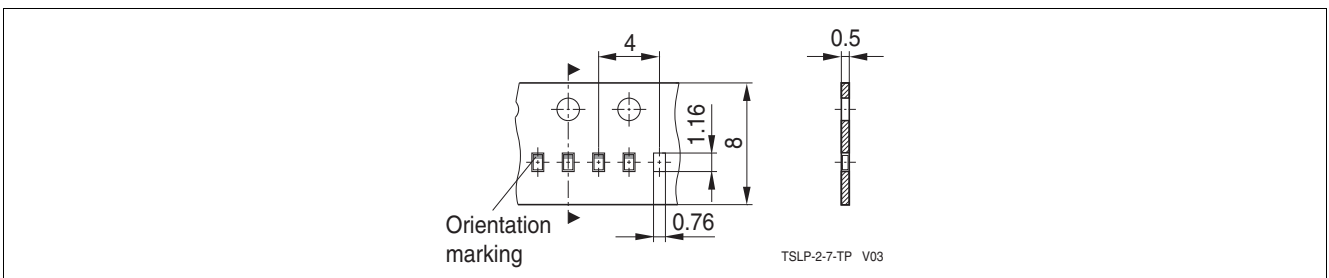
TSLP-2-17 Packing (dimension in mm)
